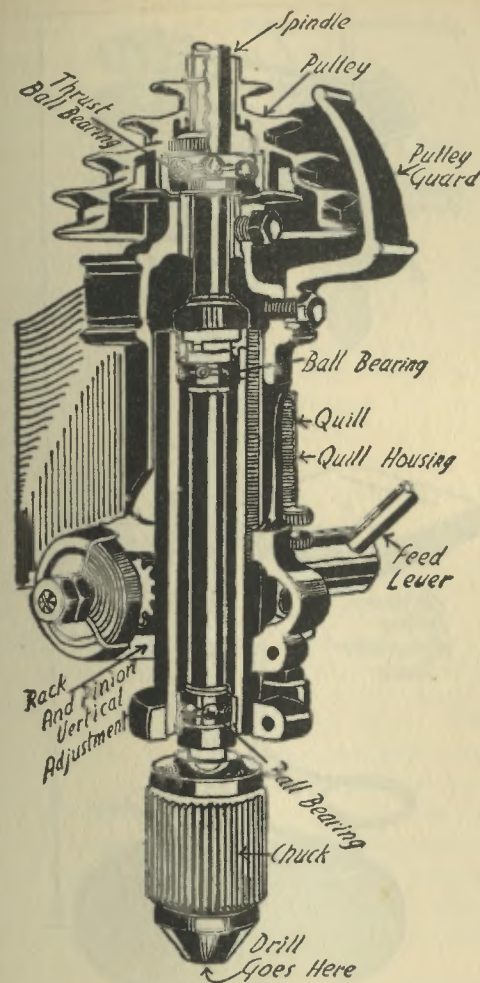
B. HEAD OF THE DELTA DRILL PRESS
